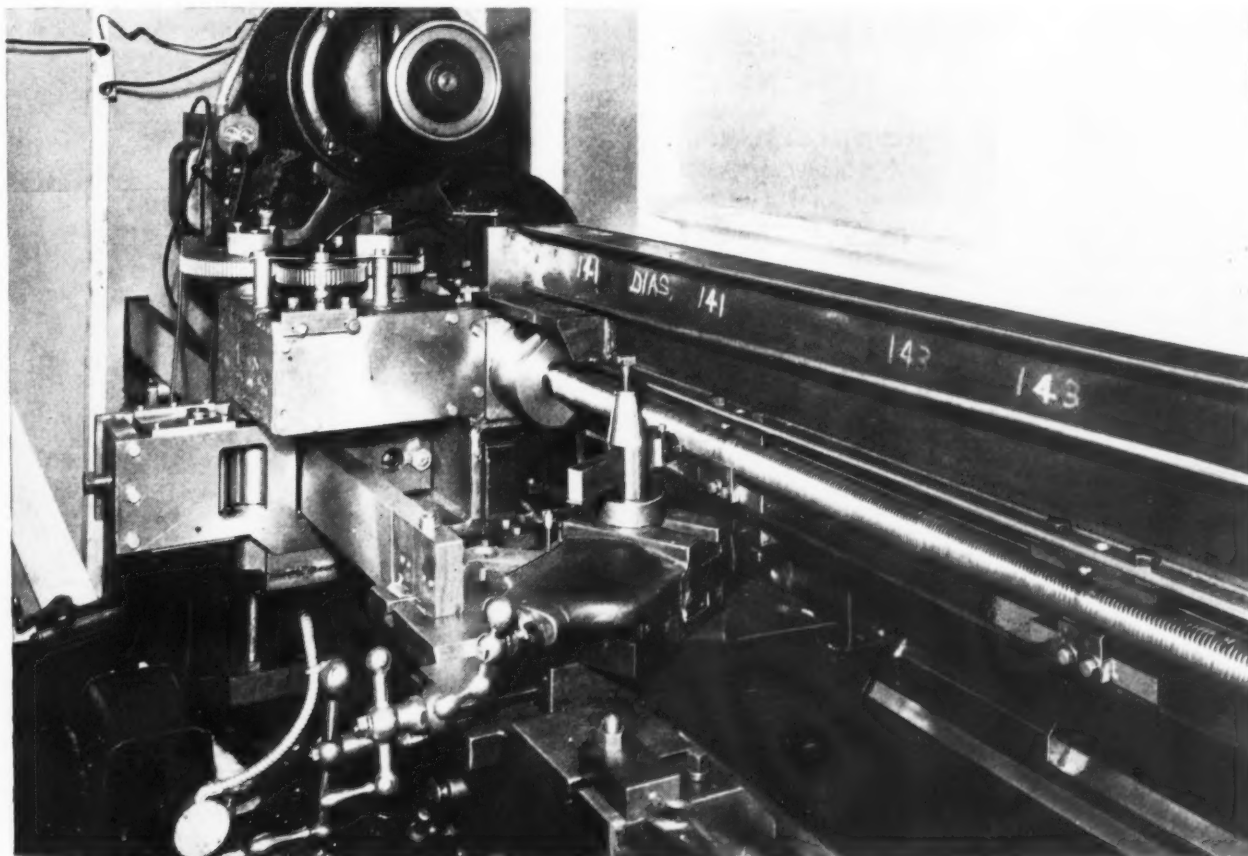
Special Lathe Set-up Employing Roll and Bar Feed, Used in Cutting Precision Lead-screws for Boring Mill
